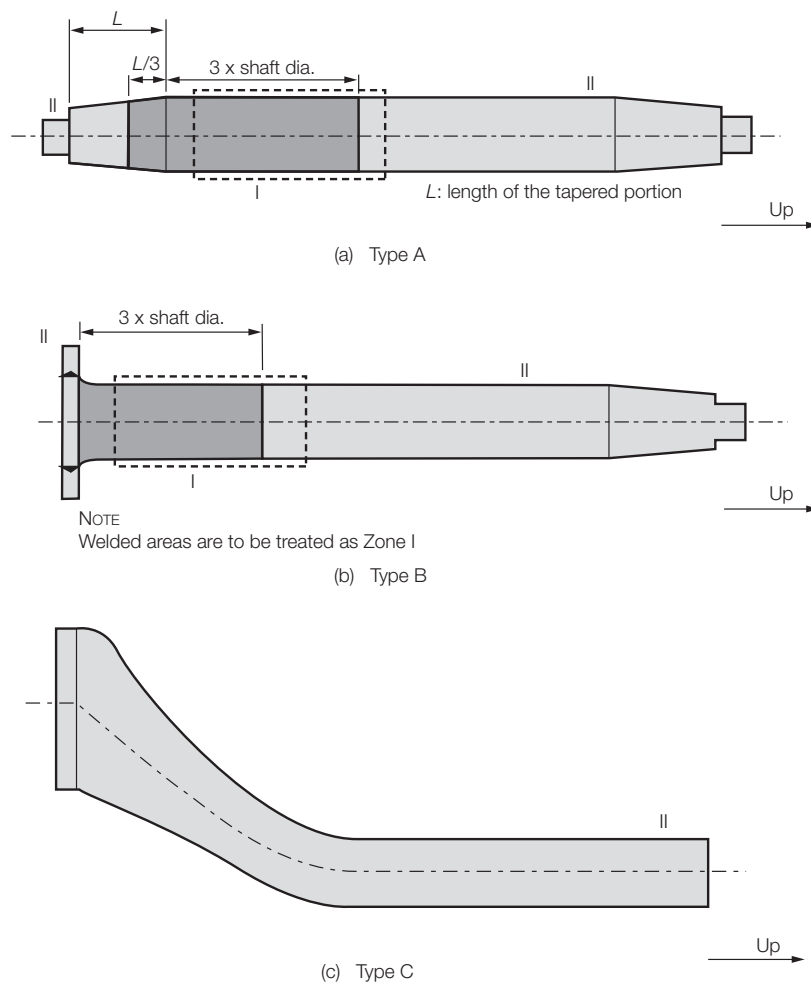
Inspection zones for magnetic particle/dye penetrant testing on rudder stocks
